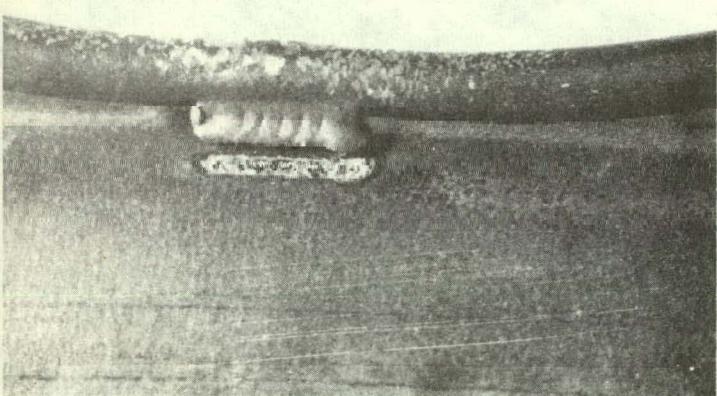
Weld failure resulting from heater rod bowing.
